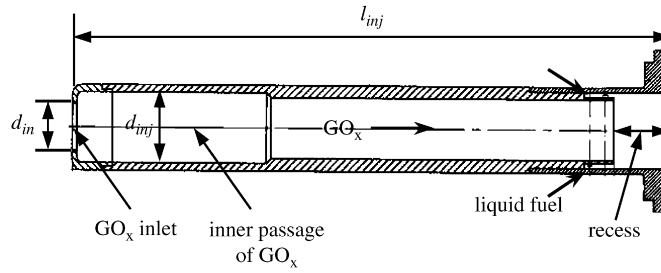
Geometry of the coaxial and gas-liquid scheme injector.
